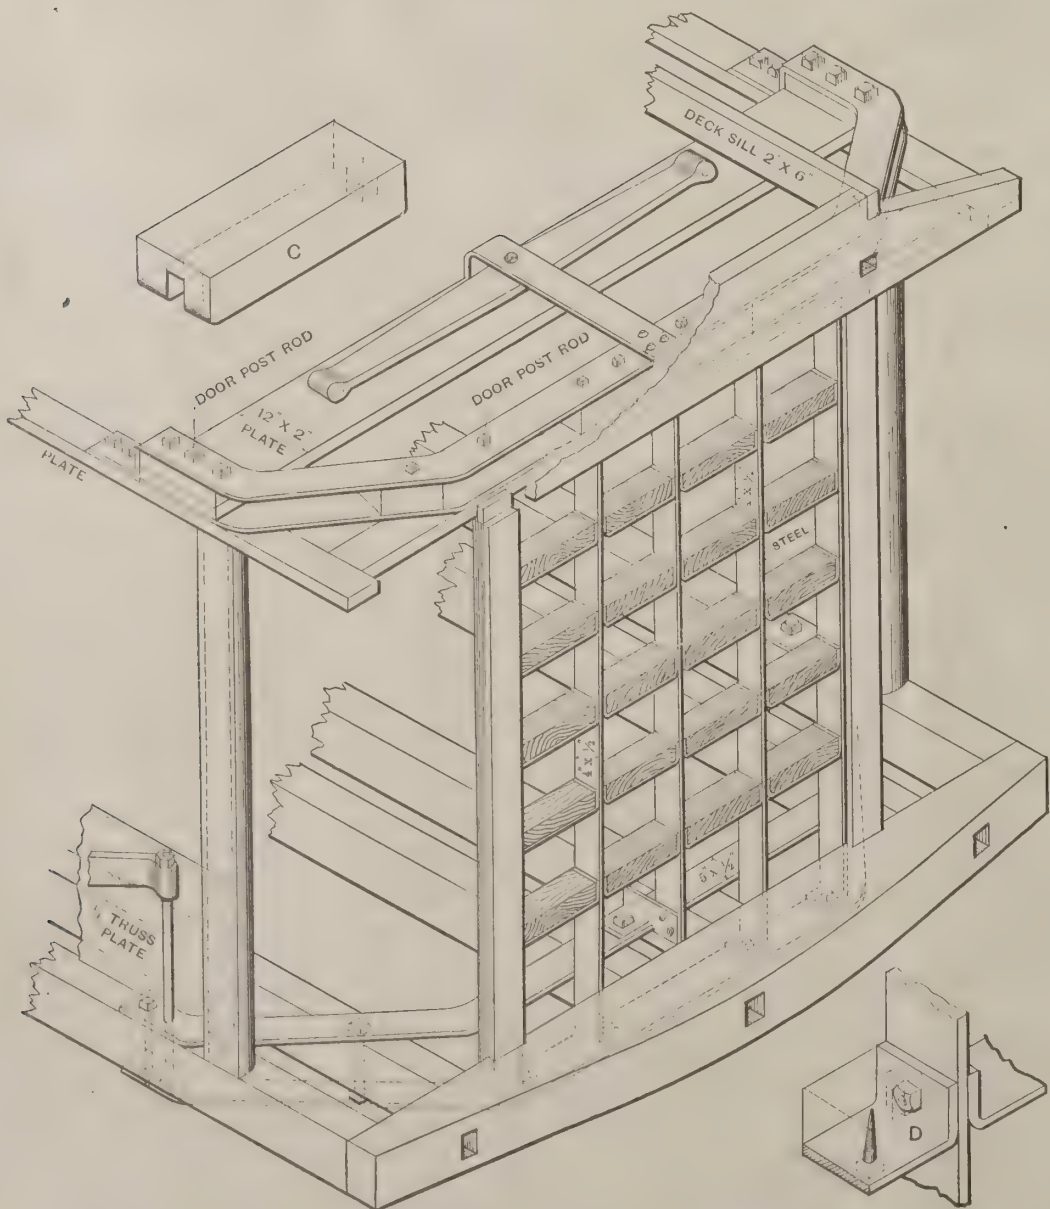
ISOMETRIC VIEW OF END FRAMING.
